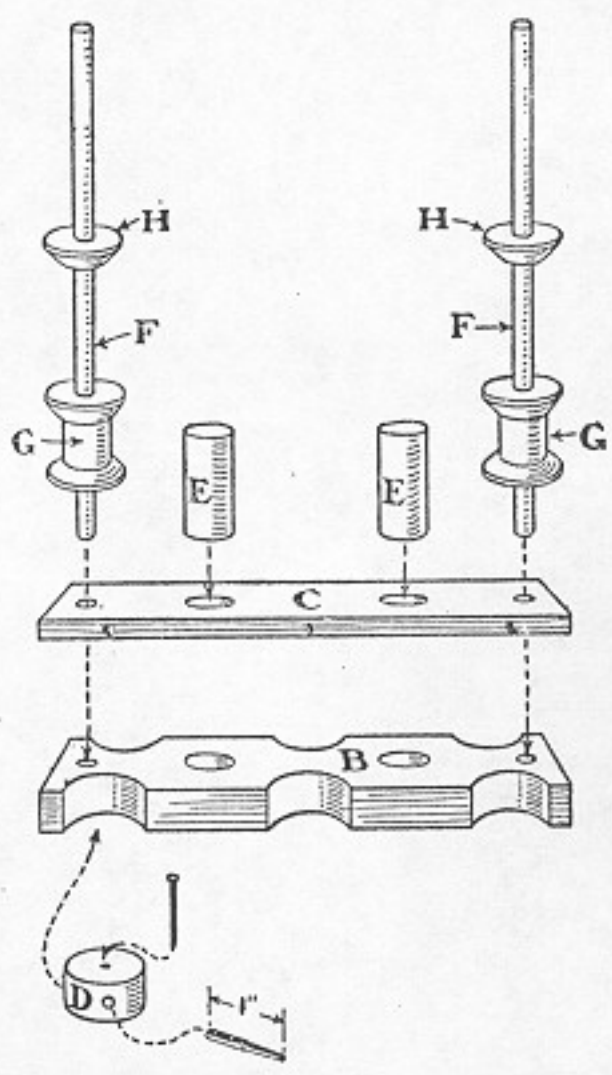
Detail Showing How Superstructure-Deck (B and C), Gun Turrets (D), Funnels (E), Masts (F), and Fighting-Tops (H) are Assembled
